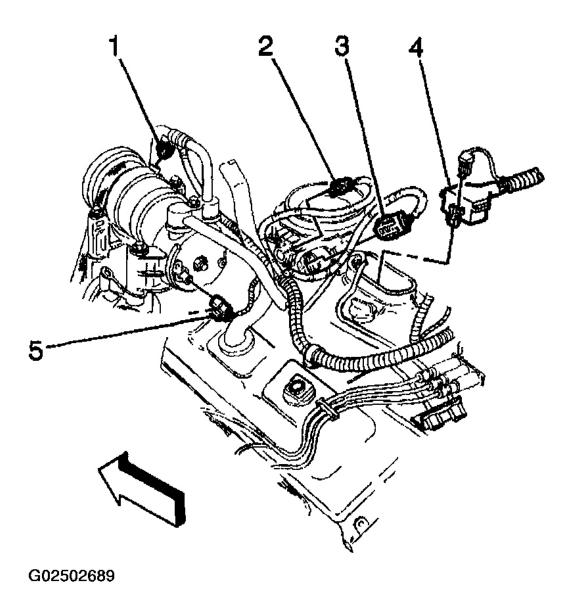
Locating A/C Compressor Clutch, A/C High Pressure Cutoff Switch, Throttle Position, Idle Air Control Motor & Fuel Meter Body Assembly Connectors
